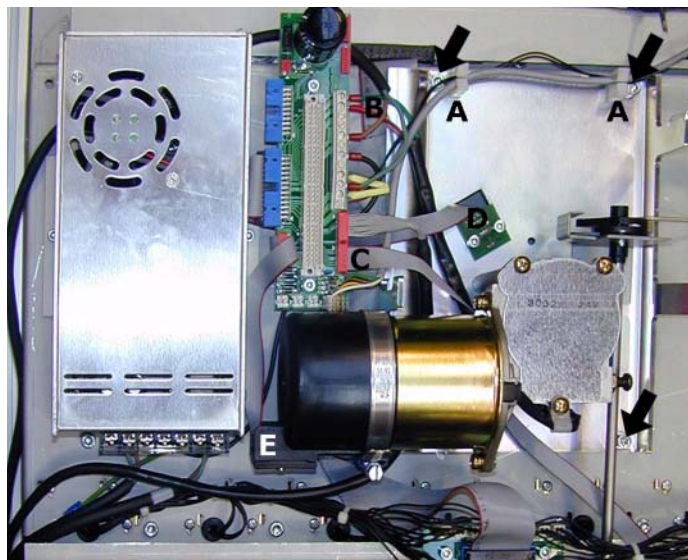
The disconnecting wires and cables are marked with letters, also the motor bedstead's fixing screws are marked with arrows to the figure.
